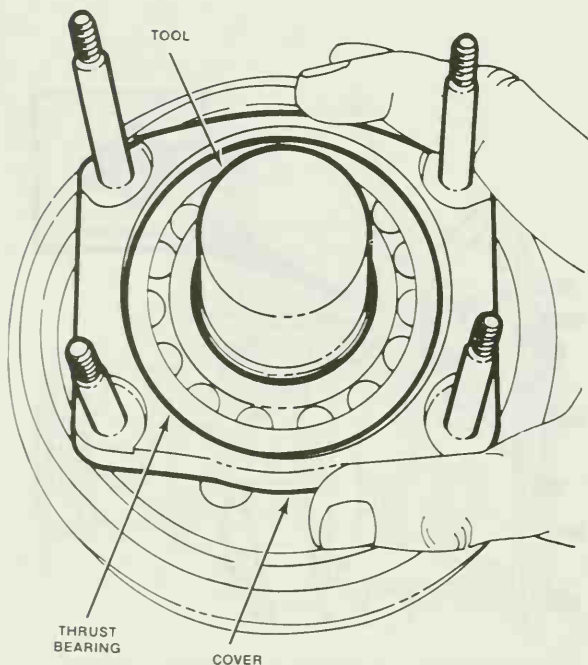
Driving the clutch hub from bearing and cover. (American Motors Corporation)
